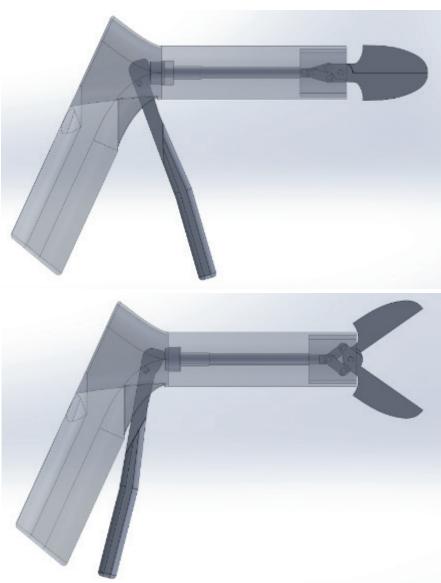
Solidworks images of the rotating hinge mechanism integrated into the handle in an open and closed stage
